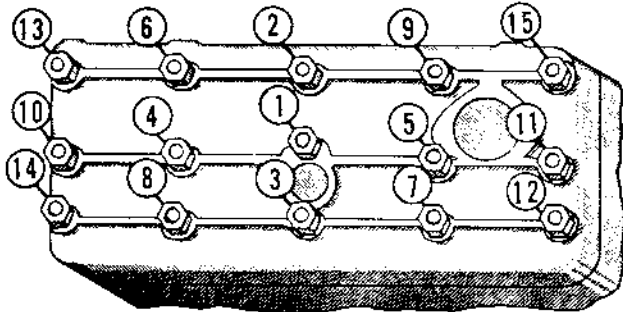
Cylinder Head Tightening Sequence — Four Cylinder
